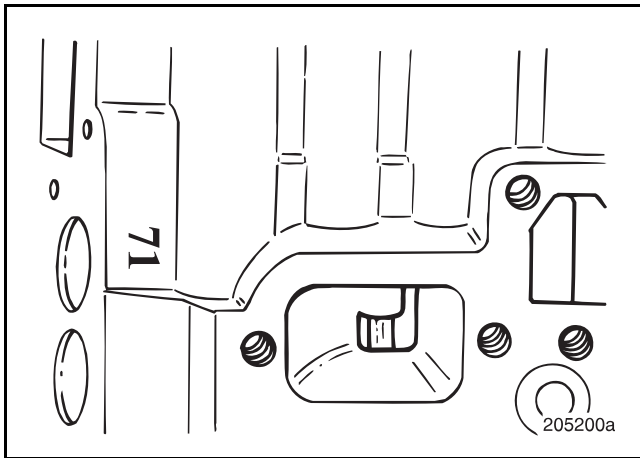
Remanufactured Cylinder Head Assembly ID
